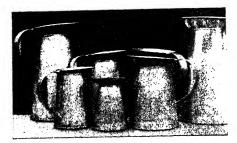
Welded Monel metal dye measuring cans used by textile industry.
